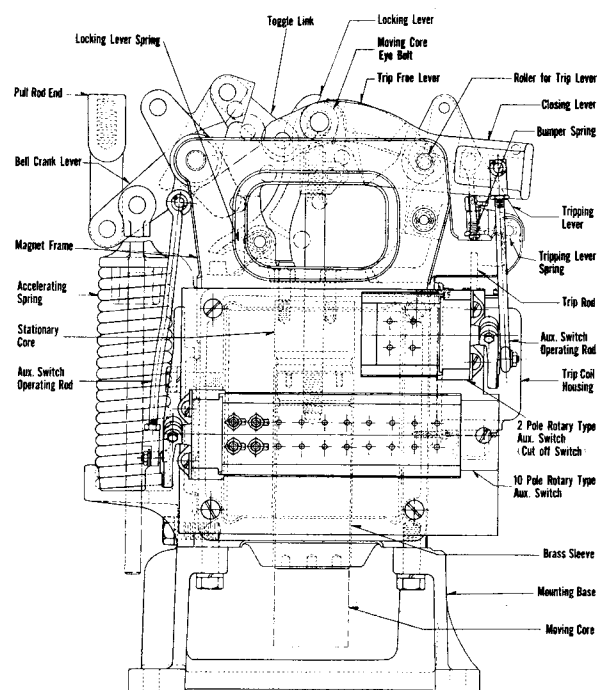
TYPE 3-INCH "SA" SOLENOID MECHANISM
